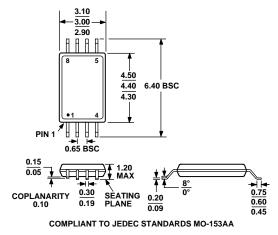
8-Lead Thin Shrink Small Outline Package [TSSOP] (RU-8) Dimensions shown in millimeters
